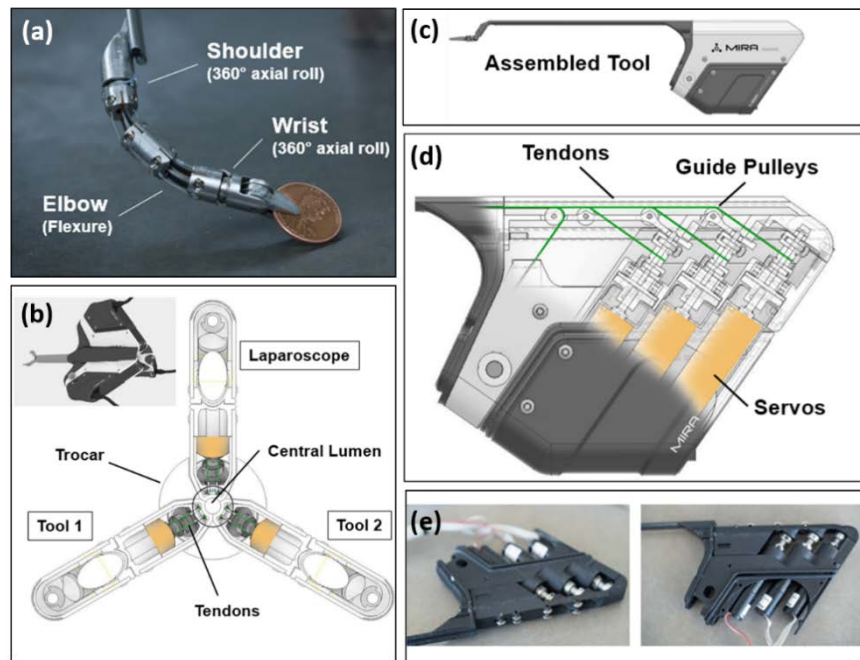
manipulator tool prototypes. (a) 5+1 degree of freedom stainless steel manipulator prototype, (b) axial cross-section of the three tools assembled in the custom trocar, (c) one full manipulator tool with manipulator at left, long cable guide tube and motor drives on the right, (d) cutaway of tool motor drive system and cables, (e) 3d printed tool with 12v gear motors, encoders and drive pulleys and cables.
